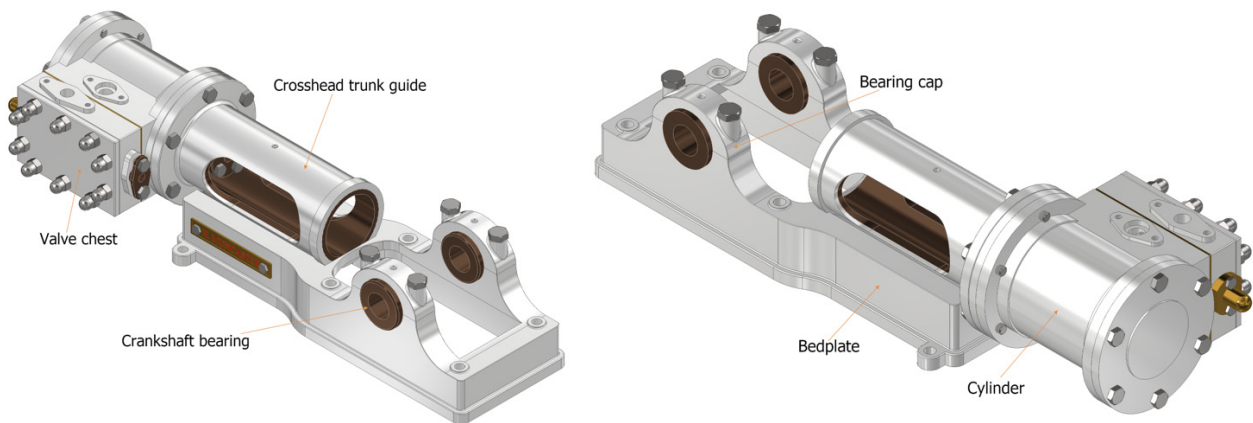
Rear view of the necessary elements for the crankshaft motion and rotation mechanism.
